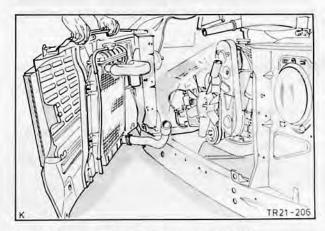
Remove radiator grille panel with radiator (only necessary on 'B' engine)
